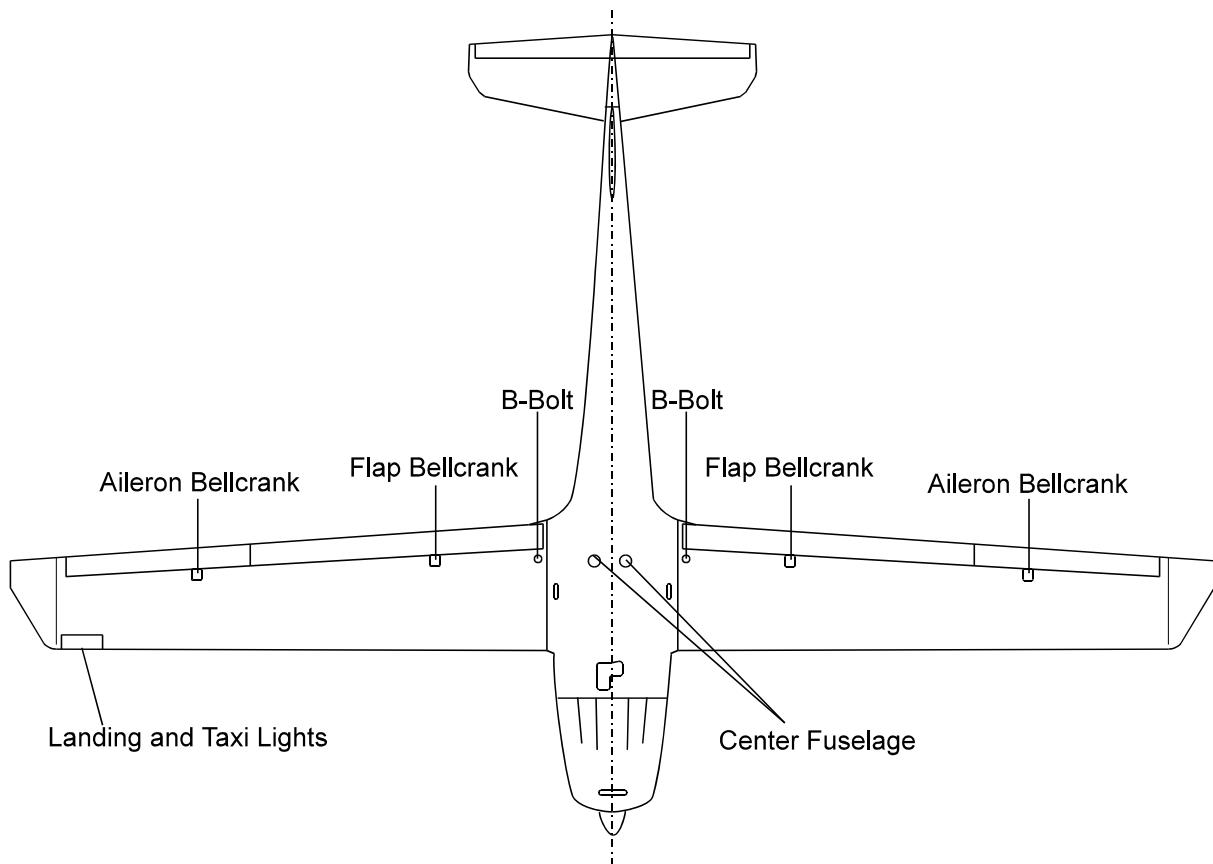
Access Panel Locations on the Bottom of the Aircraft
